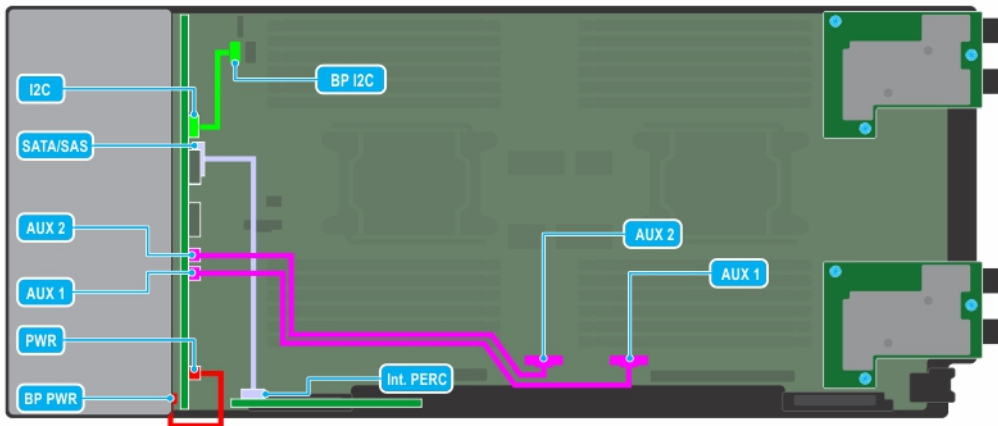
Cable routing - 8 x 2.5 inch drive backplane with PERC card
